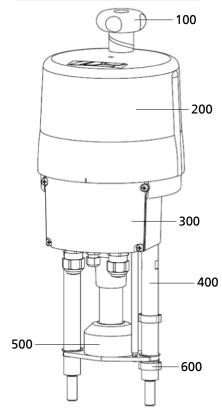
General assembly drawing, handwheel on top (EA-C 20 to 140)
